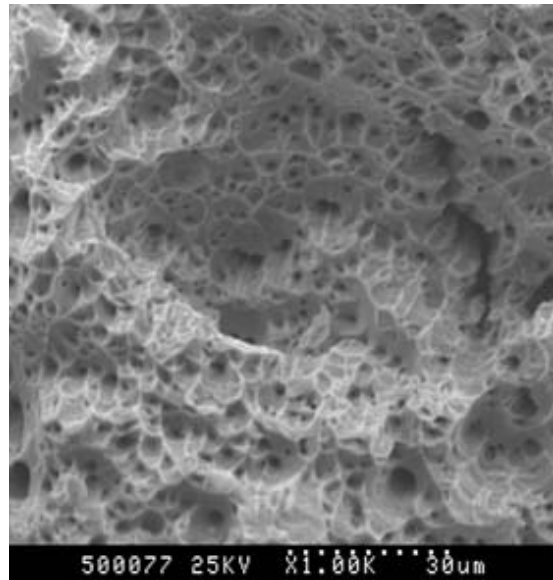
316L tested in 25 MPa H₂ at -40°C showing ductile fracture (1000x)
